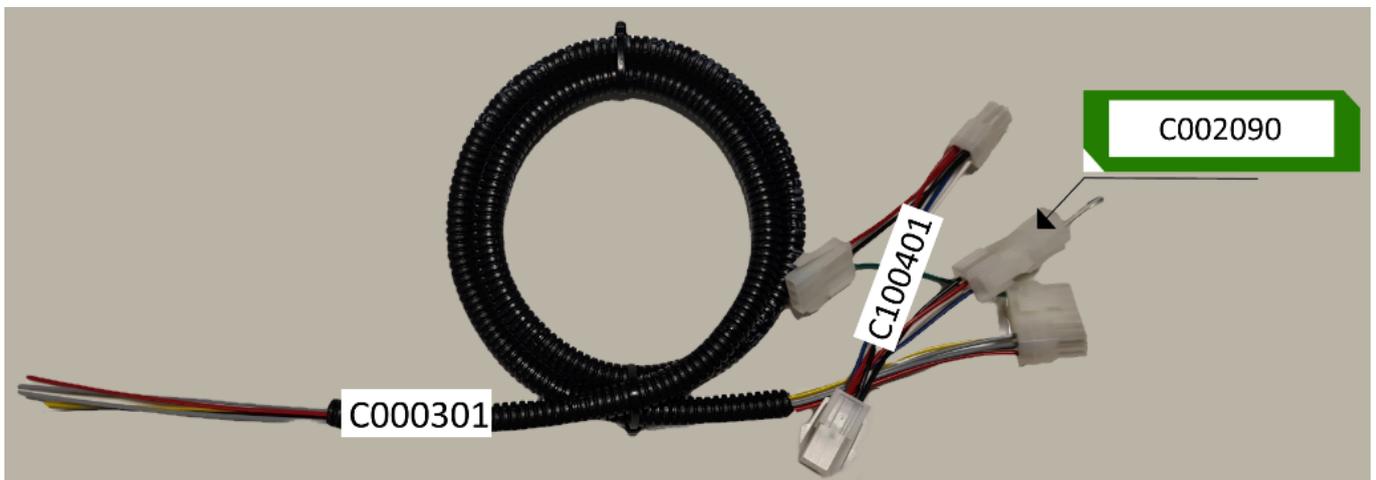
KeyDN cable - Machine: C000301 + C100401 + C002090
